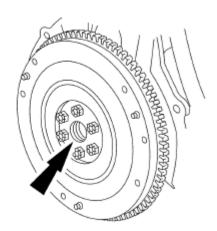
Locating Transaxle Input Shaft Pilot Bearing Courtesy of FORD MOTOR CO.
